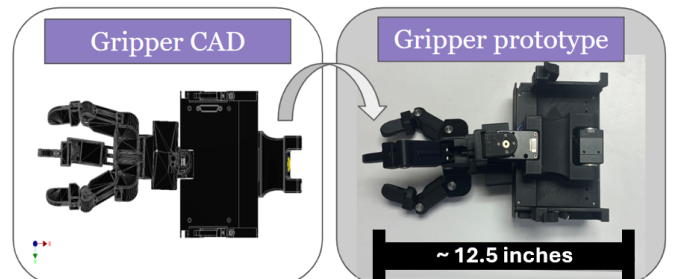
Three-finger gripper CAD model next to the manufactured prototype.
